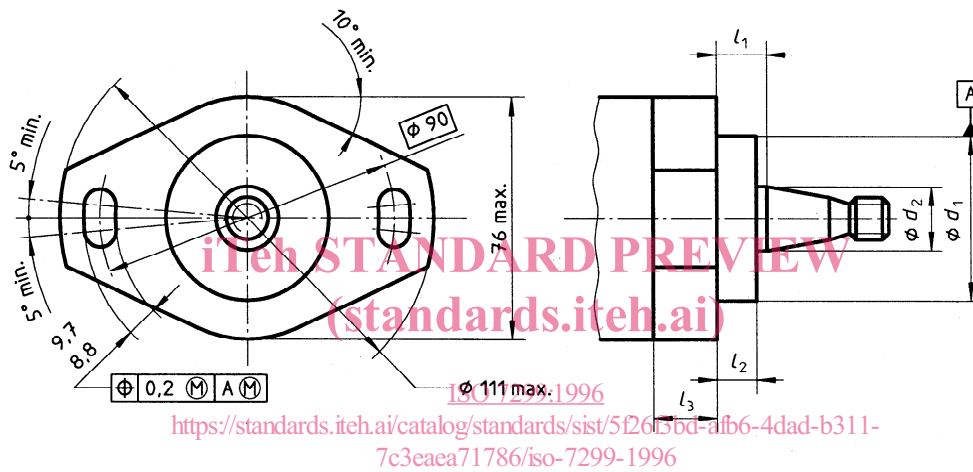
Rotary and distributor fuel injection pumps — Type 1 end-mounting flange
